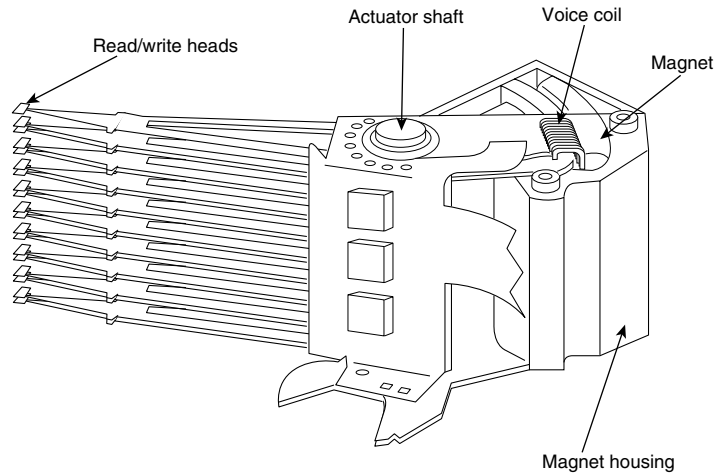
Read/write heads and rotary voice coil actuator assembly.
